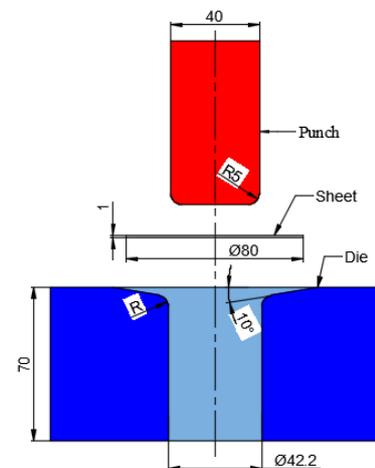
Mold set used in analysis (dimensions are in millimeters)
